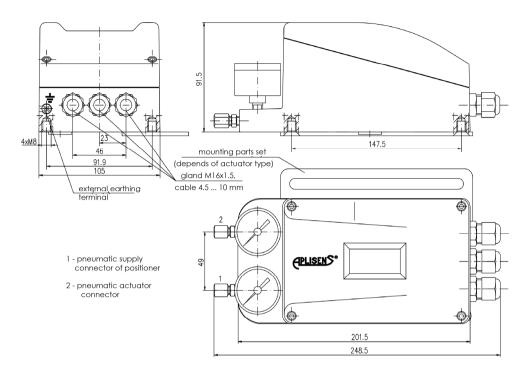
Overall dimensions of the APIS-101-... and APIS-151-...positioner
